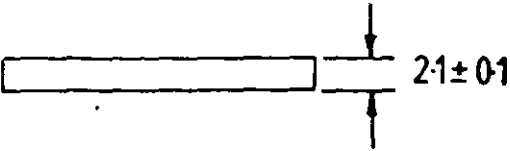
THE COMPRESSIVE TEST SPECIMEN
